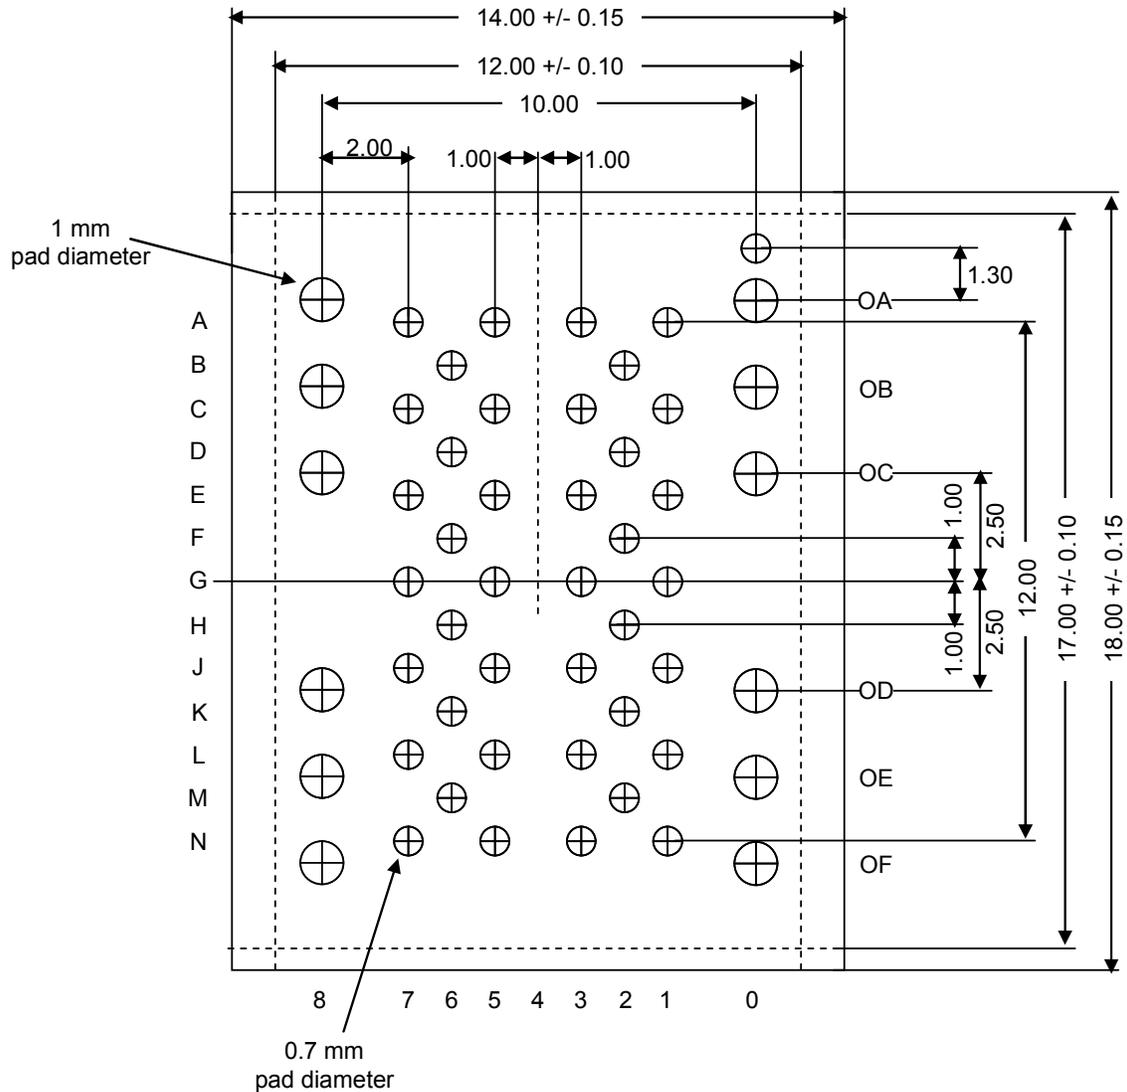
LGA-52 pad spacing requirements (bottom view, dimensions in millimeters)
